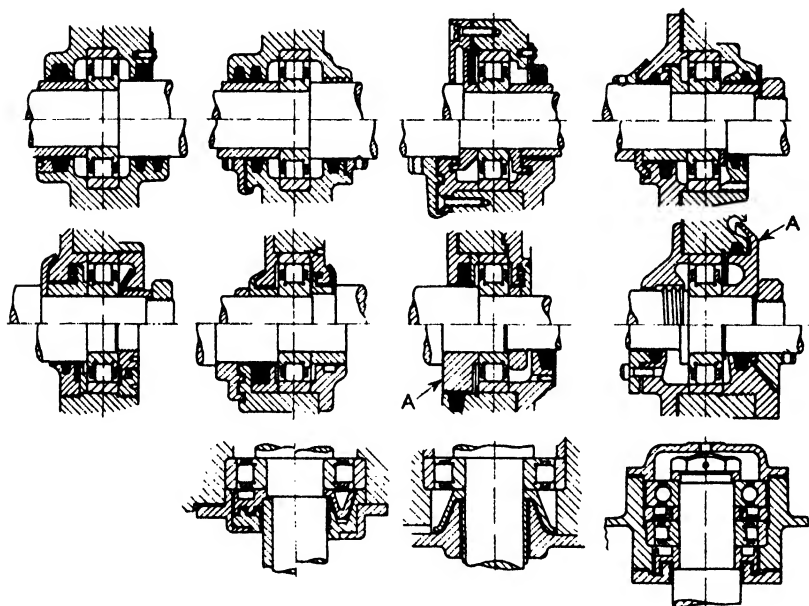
Designs of Housings for Horizontal and Vertical Applications of Roller Bearings
